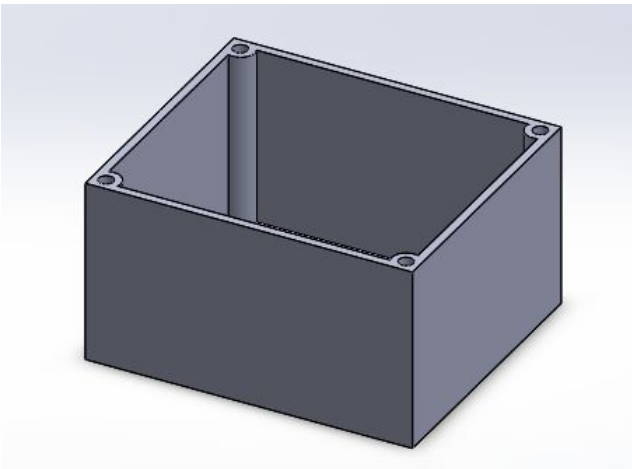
The PLC box needed to be simple and have enough room to hold the necessary wiring.
